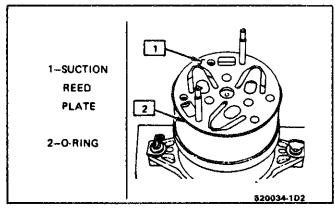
Suction Reed Plate Assembled to Cylinder Assembly
